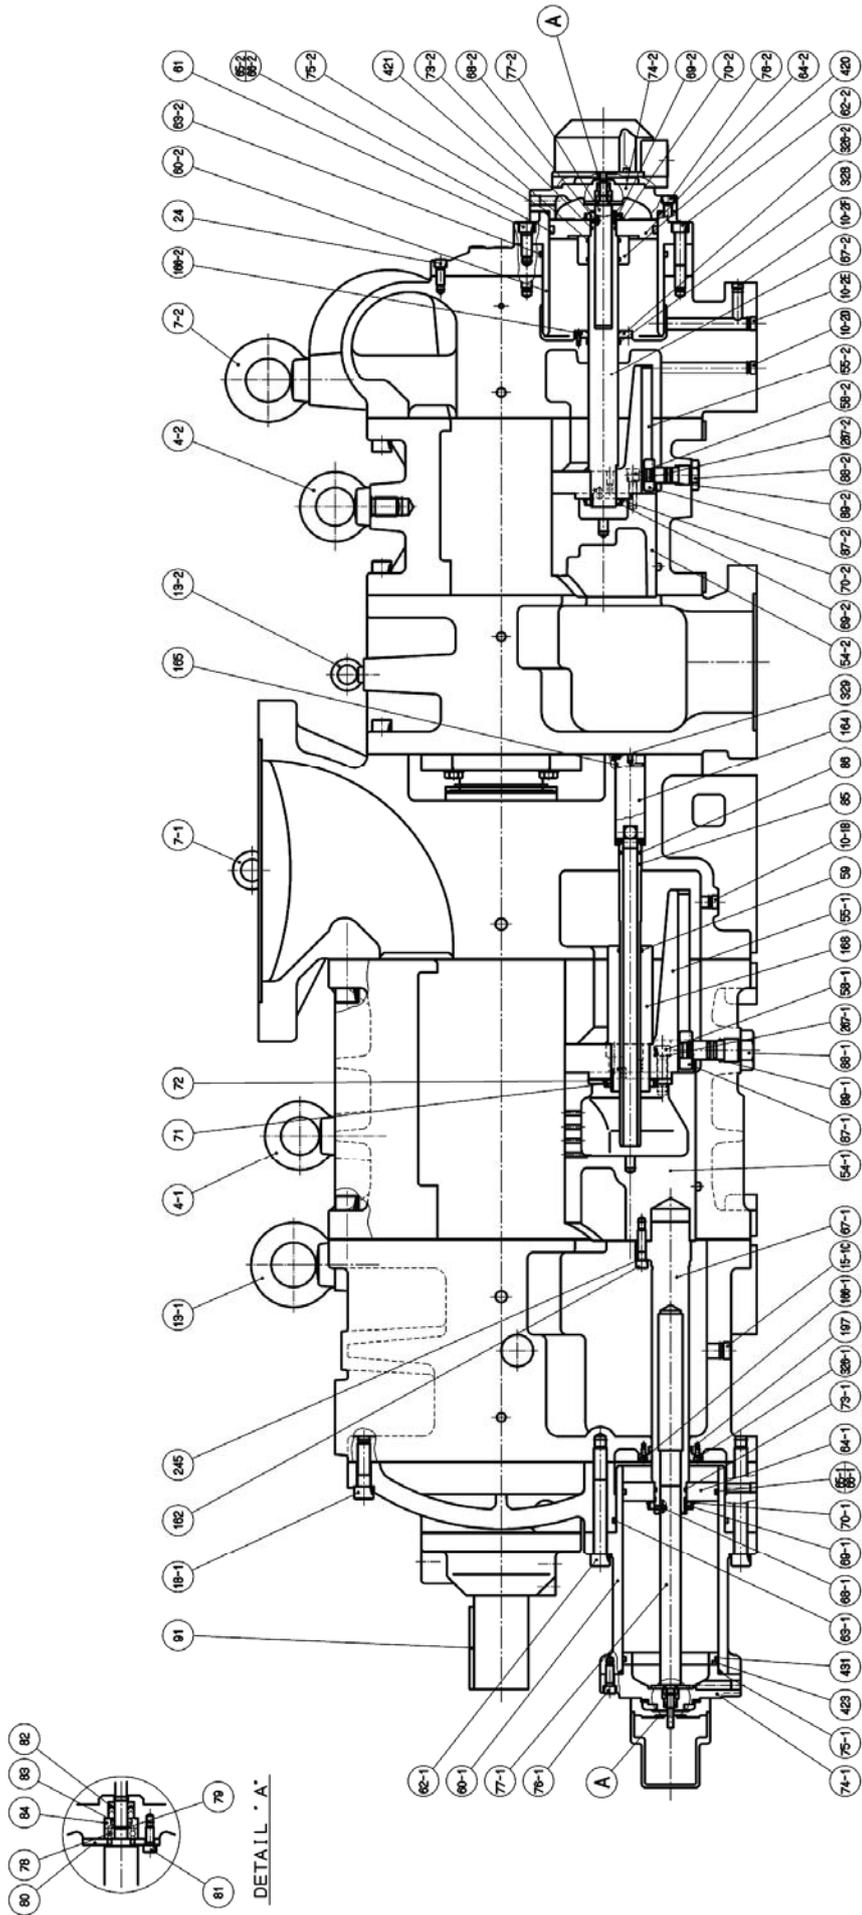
3225MSC Assembly Sectional View (Vertical)
